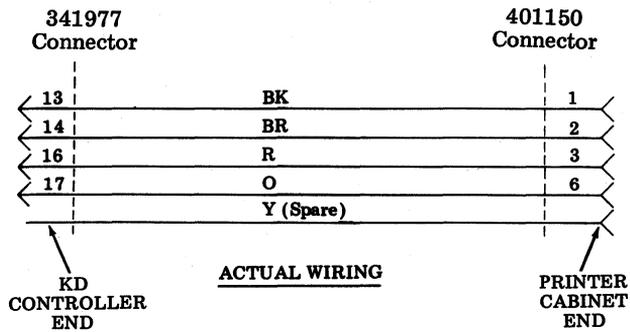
341895 Printer Extension Cable Assembly (SSI)
